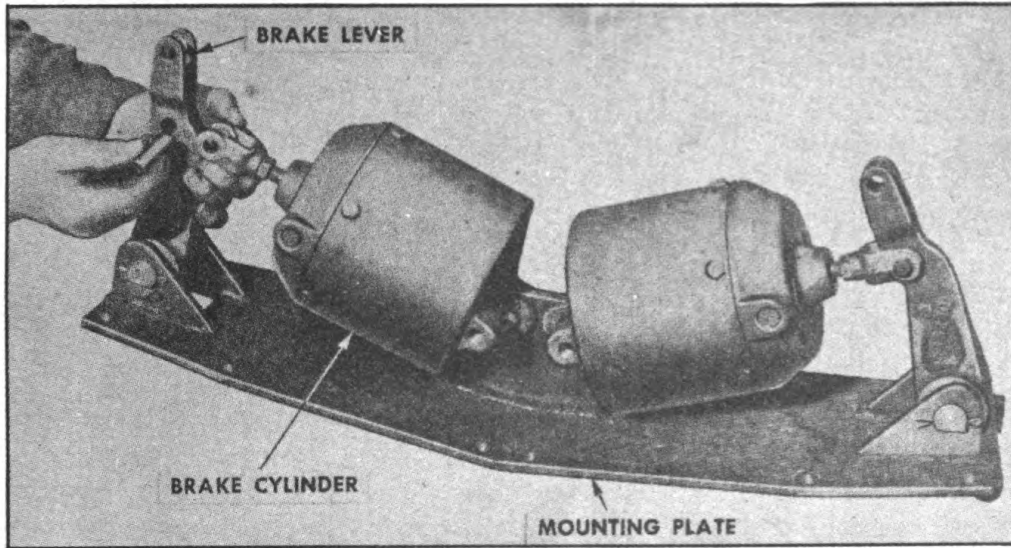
REMOVING CYLINDER FROM MOUNTING PLATE
